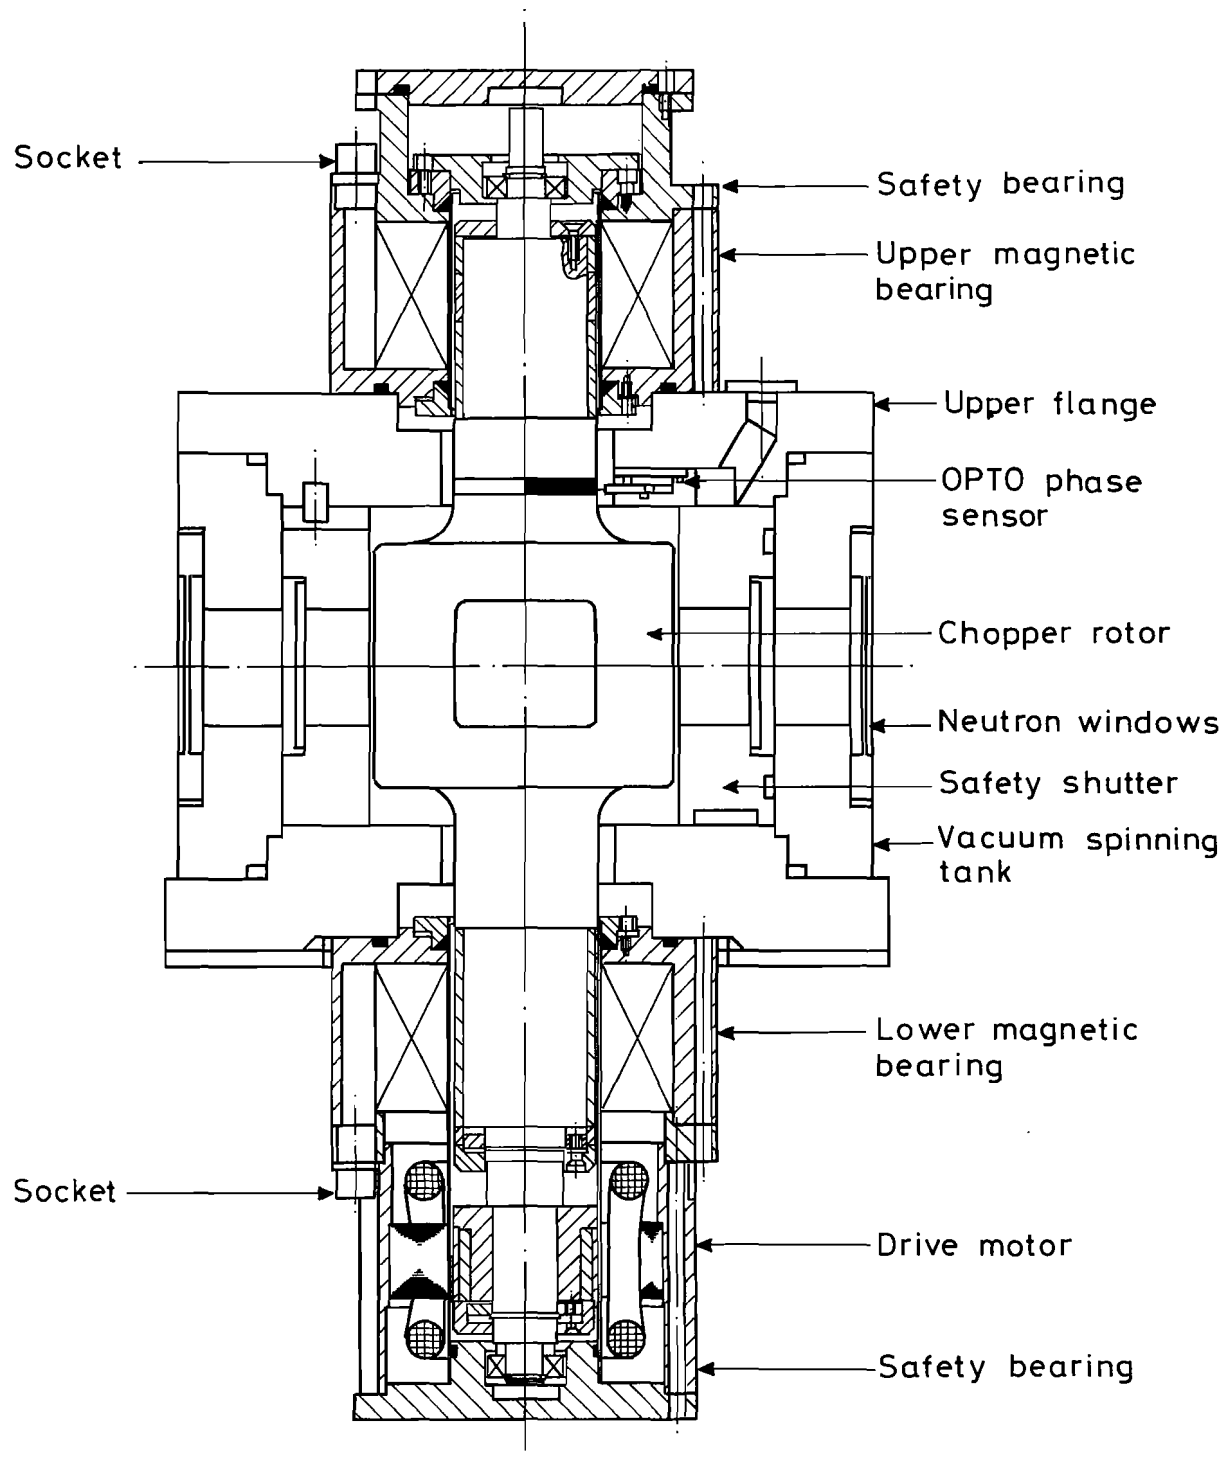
Sectional Assembly Drawing of the HET magnetically suspended chopper.
